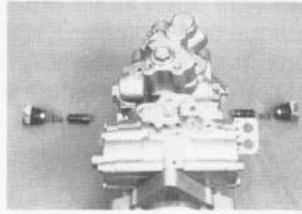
Remove Check and Relief Valves (PV Shown)
